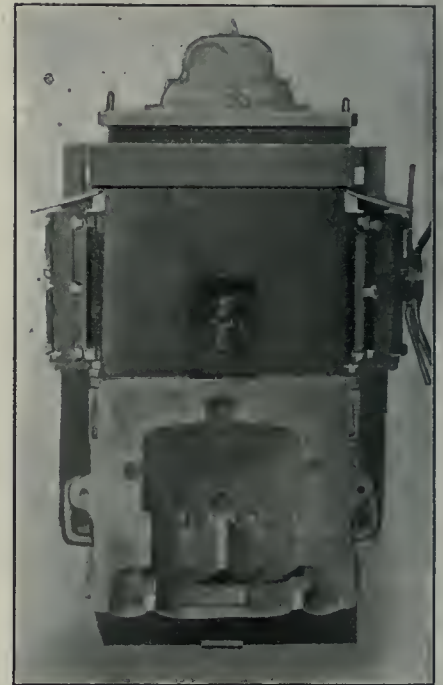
MOLD REMOVED AND STRIPPING PLATE IN POSITION FOR MAKING ANOTHER MOLD.
